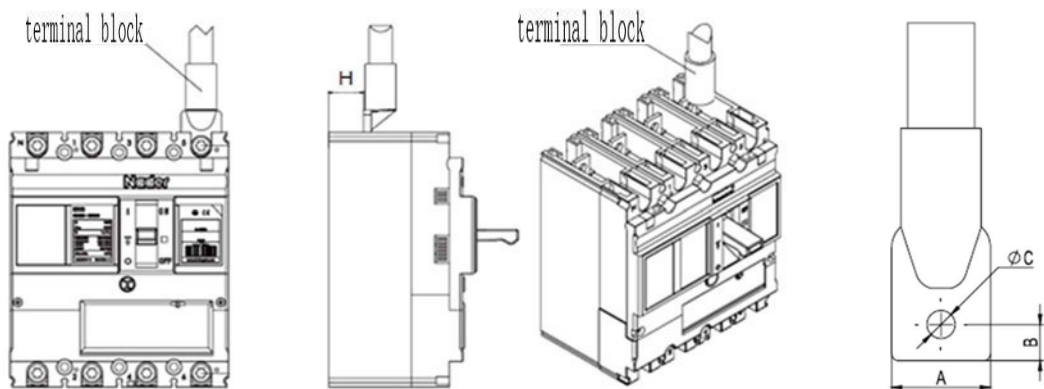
Connection diagram of copper bar in front of board or copper cable with wiring terminal
